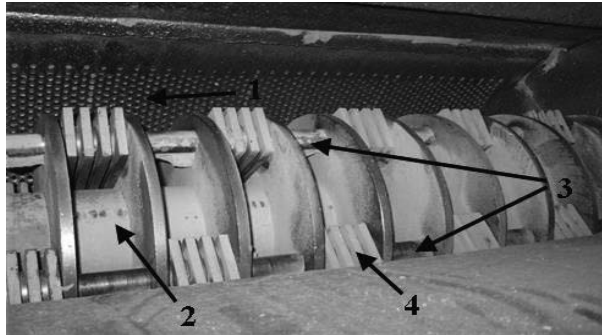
A view of the inside of the mill for waste paper grinding: 1 – sieve, 2 – main shaft, 3 – fixing pivots, 4 – beaters
